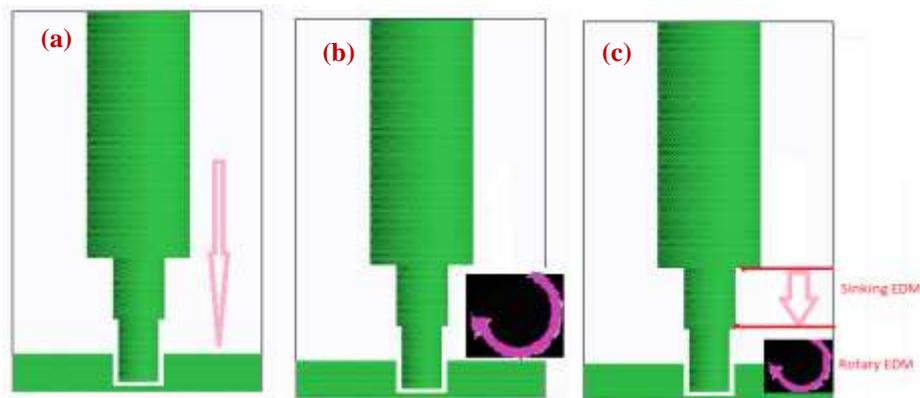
Electrode configuration (a) Sinking electrode method (Step -1 & 2), (b) Rotary electrode method (Step -1 & 2) and (c) Combination Method (Step-1- Rotary and Step-2- Sinking)
